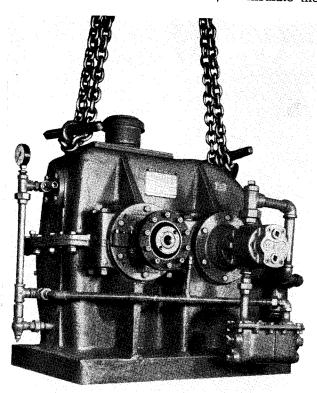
Correct Method of Hoisting High-Speed Gear Drive
